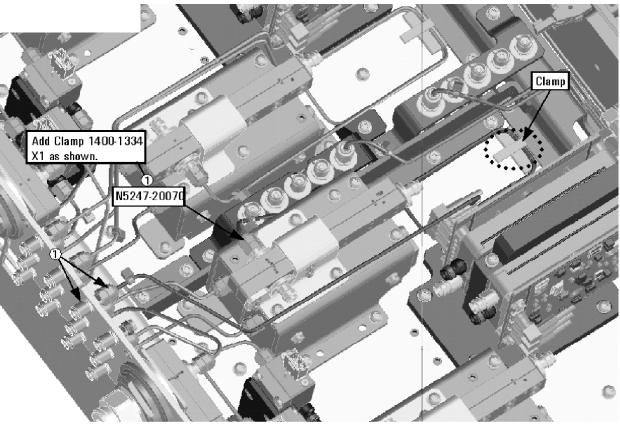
Location of Cable Clamp (1400-1334) to Secure W37 (N5247-20070)
